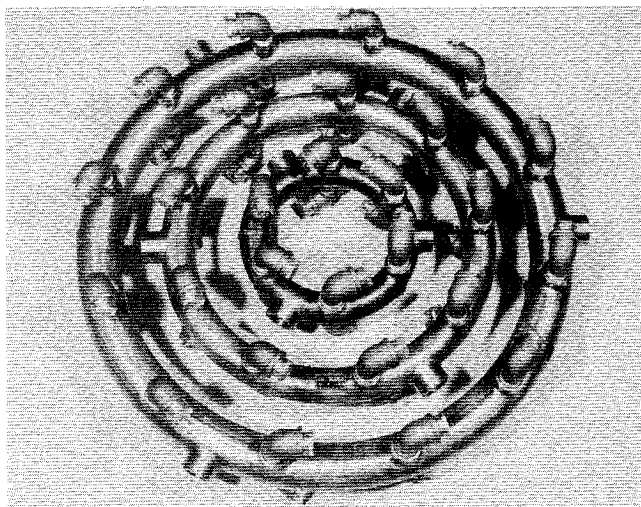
Manifold rings and elbow nozzles (unassembled).
